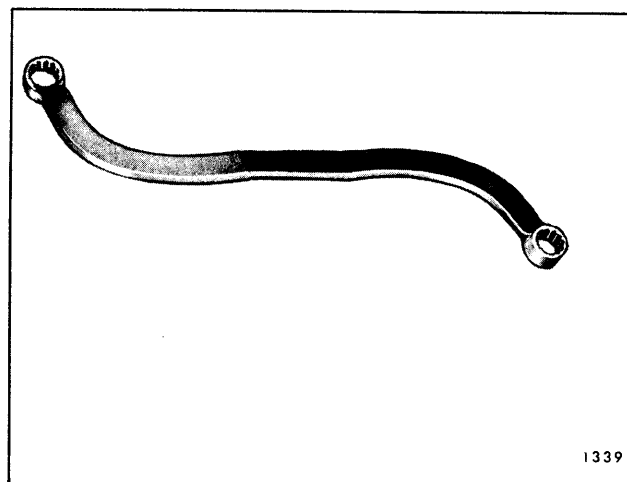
Front Door Hinge Tool J-21550 (1/2" Box) - "F, X & Z" Styles
